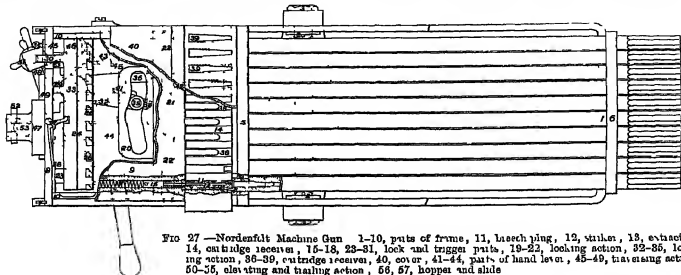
Nordenfält Machine Gun. 1-10, parts of frame, 11, breech plug, 12, striker, 13, extractor, 14, cartridge receiver, 15-18, 23-31, lock and trigger parts, 19-22, locking action, 32-36, loading action, 36-39, cartridge receiver, 40, cover, 41-44, parts of hand lever, 45-49, traversing action, 50-55, elevating and tramping action, 56, 57, hopper and slide.
